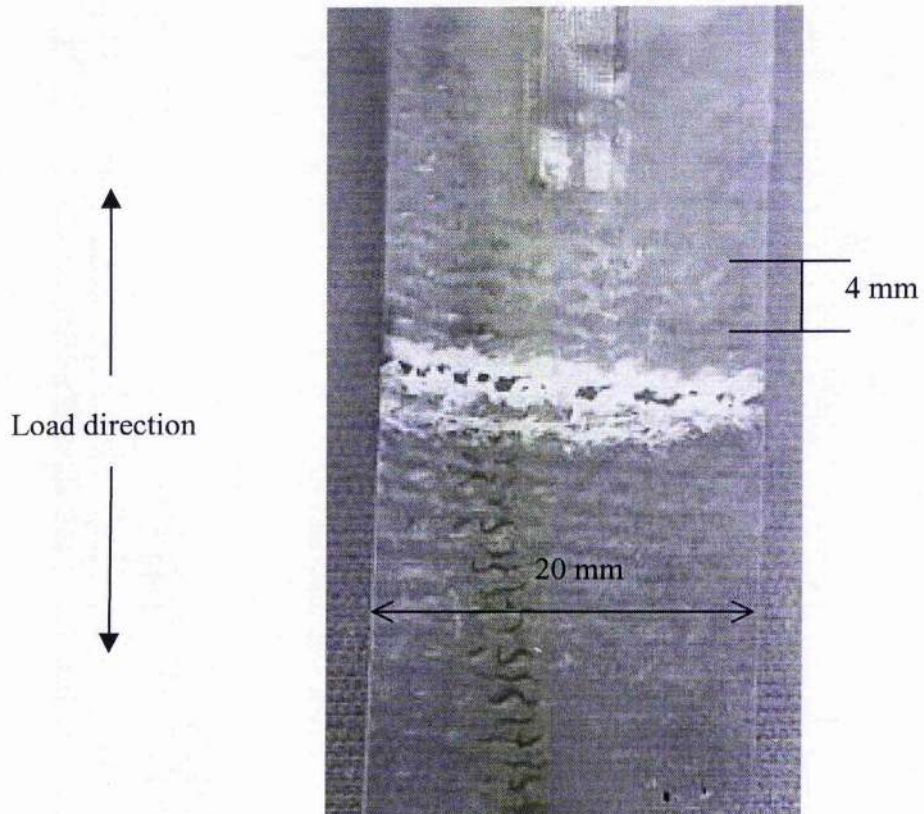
Fractured specimen tested in the 90° (course) direction.
